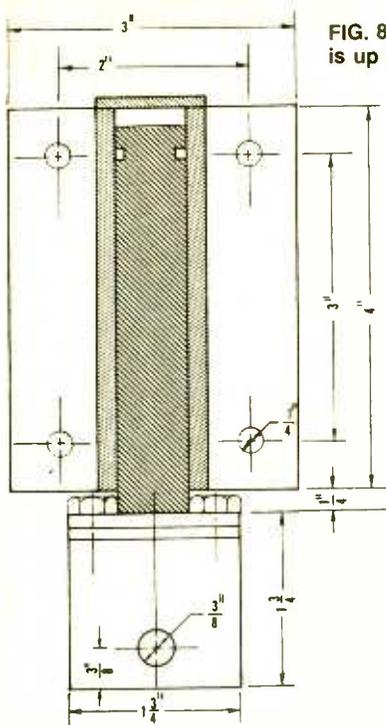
EXACTLY HOW you pivot the end of the rotator assembly is up to you. Detailed here is how the author did it.
